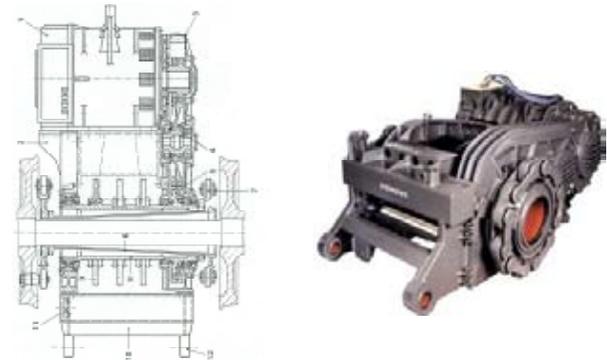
Integrated unit with auxiliary hollow shaft with brake discs (ICE 1, ICE 2)
